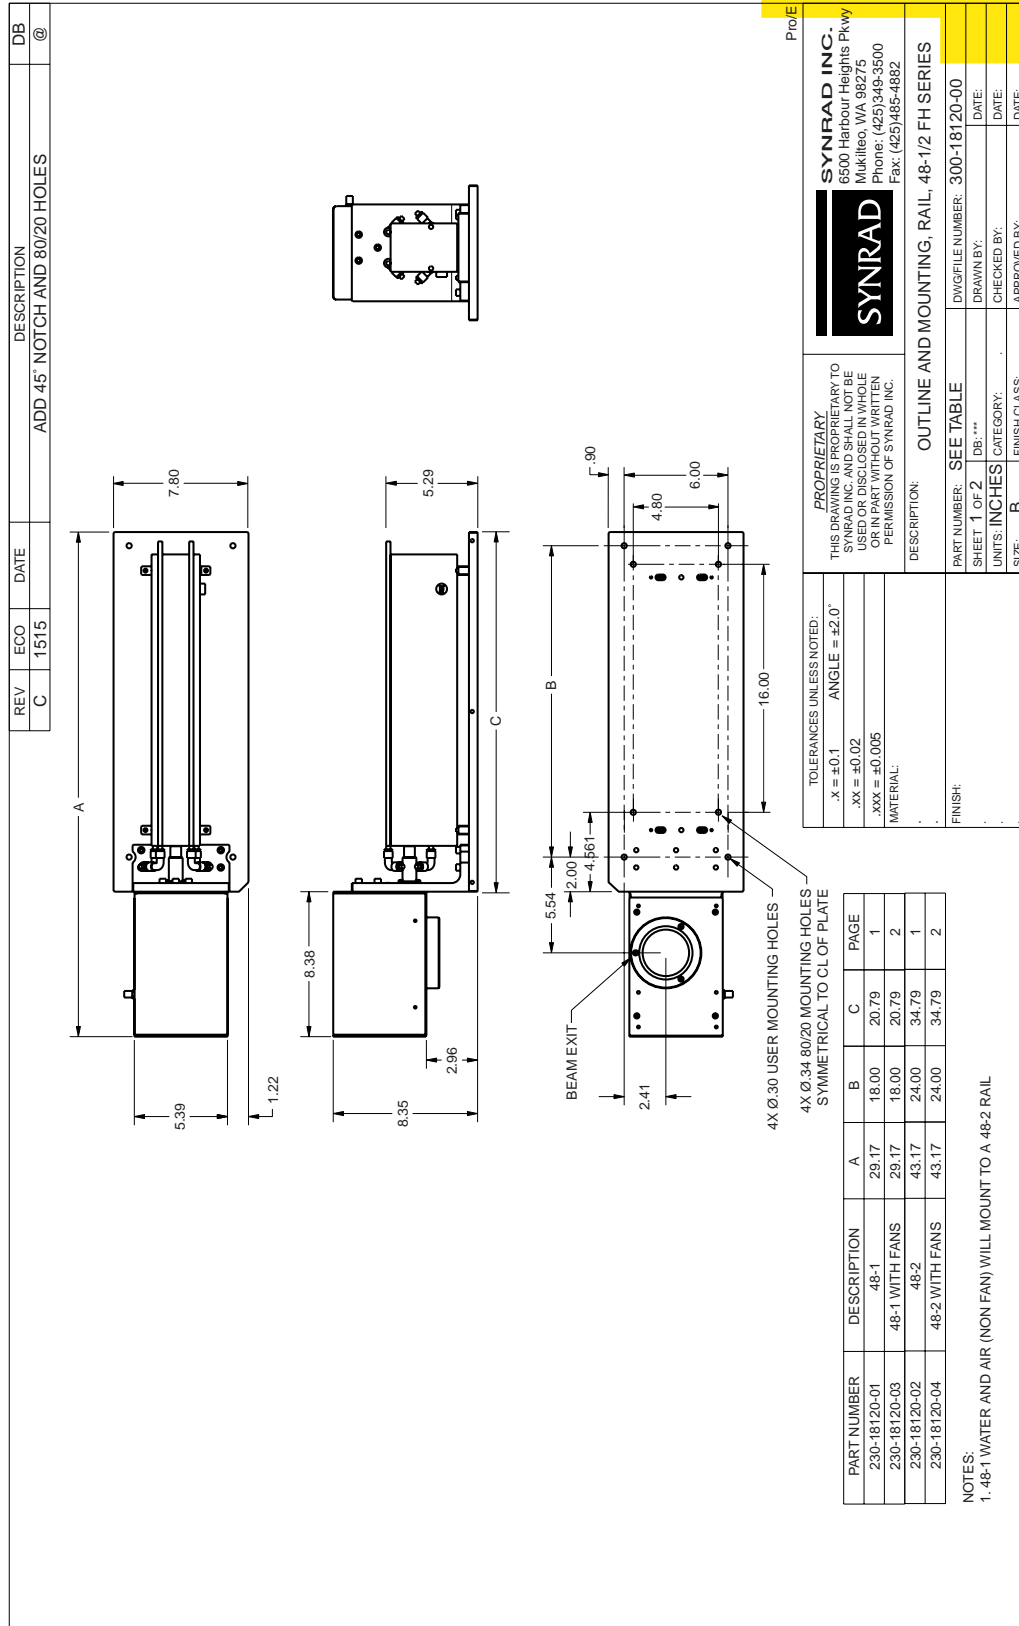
FH Head / Model 48-1/48-2 package outline and mounting dimensions
